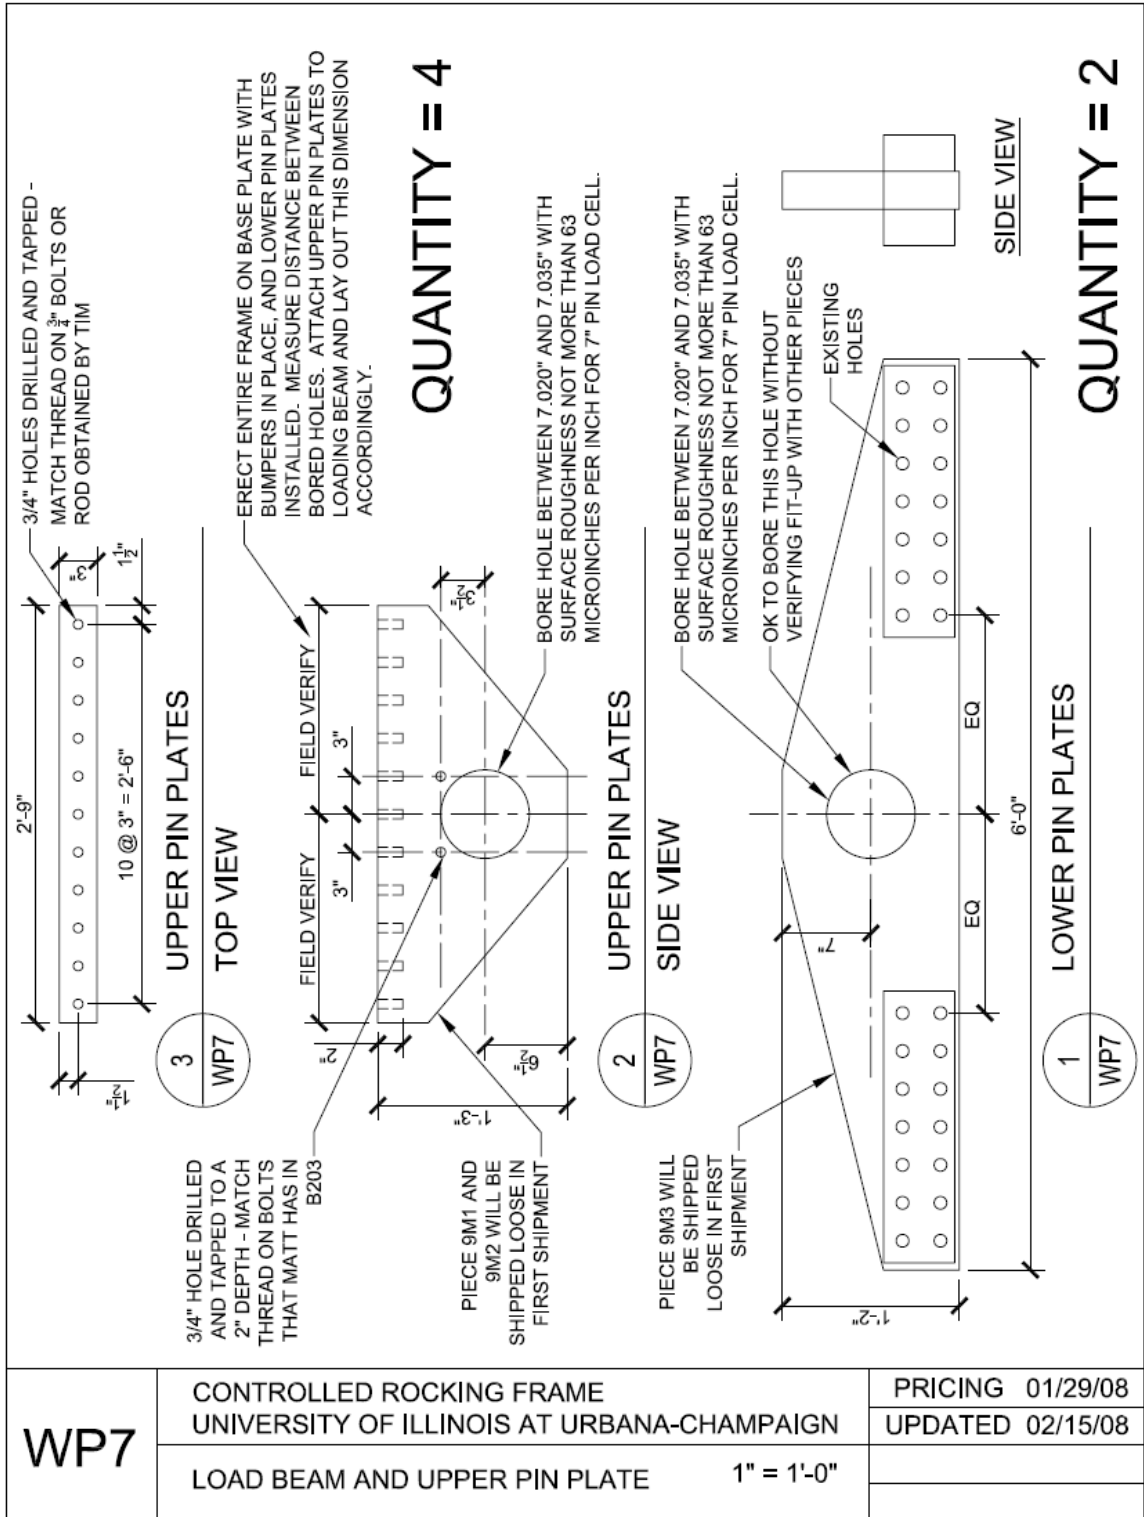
Work Plan Drawing – Load Beam and Upper Pin Plate
